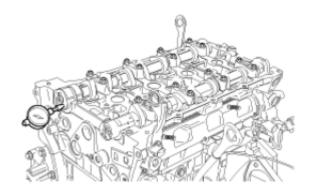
Measuring Camshaft End Play Courtesy of HYUNDAI MOTOR CO.
